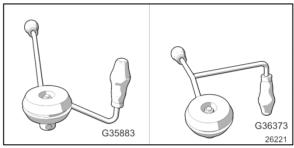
INFLATABLE SEAL ROLLER TOOLS
